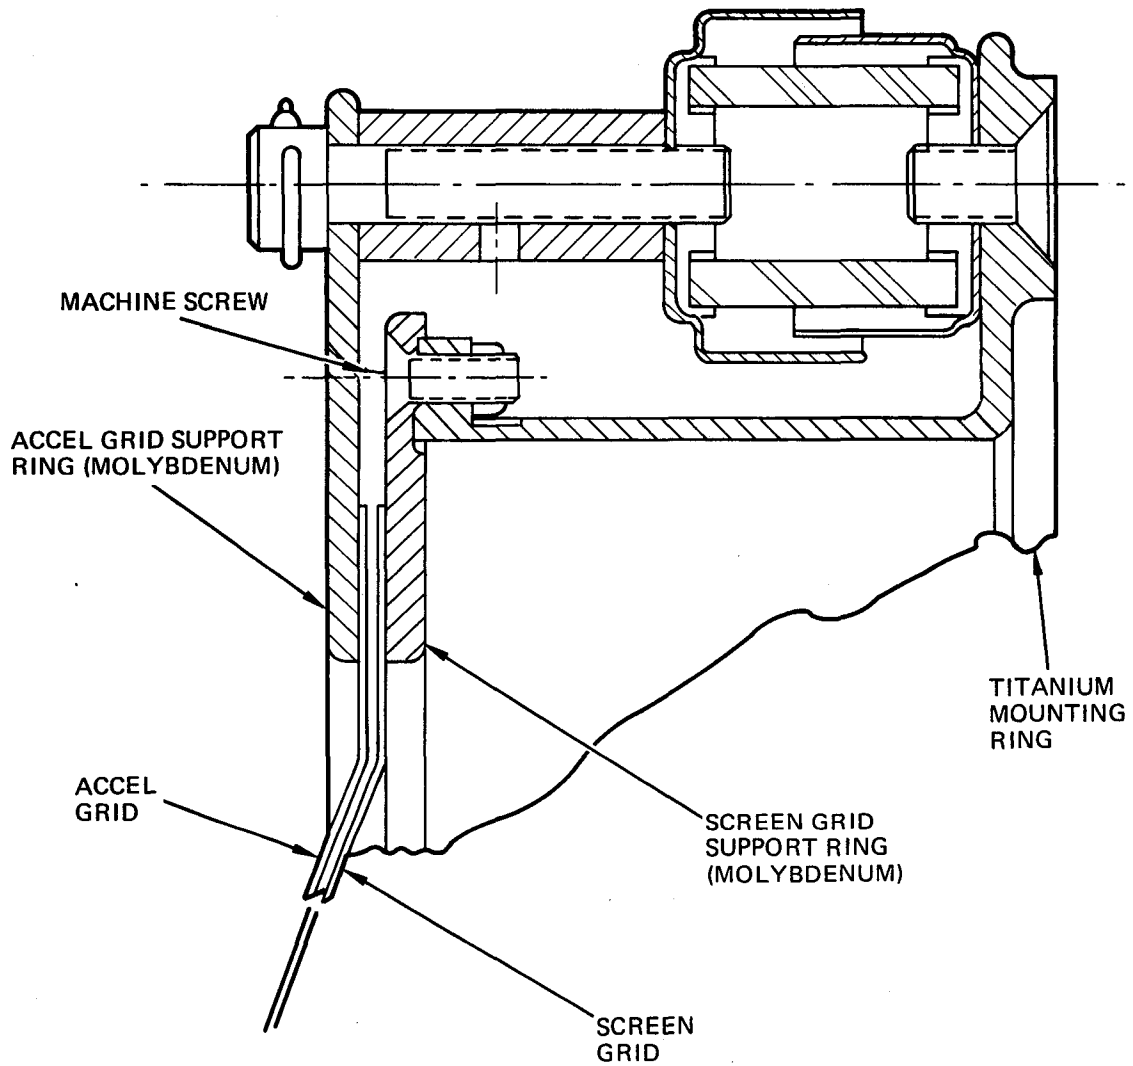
Detail of 30-cm, J-series grid mounting to support ring.
